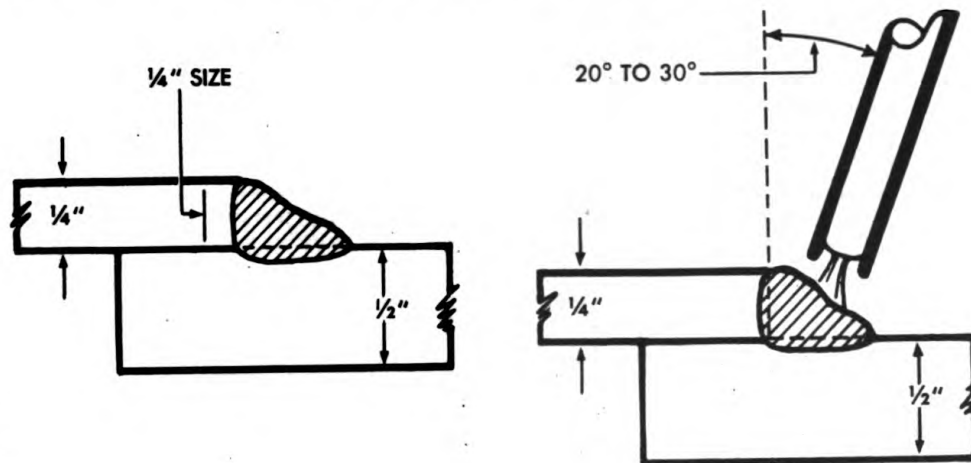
Position of Electrode for Fillet Weld on Lap Joint in Horizontal Position (3/8-in. plate)
